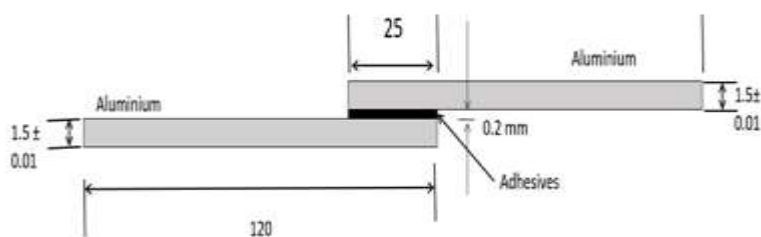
Geometry of single lap adhesive joint with 25 mm width (dimensions in mm).
